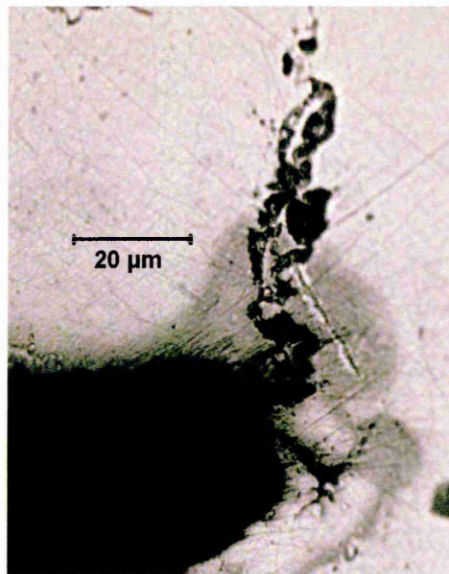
1.2mm V1437(top) – 1mm 2205 lap joint fatigue crack in the 1mm 2205
